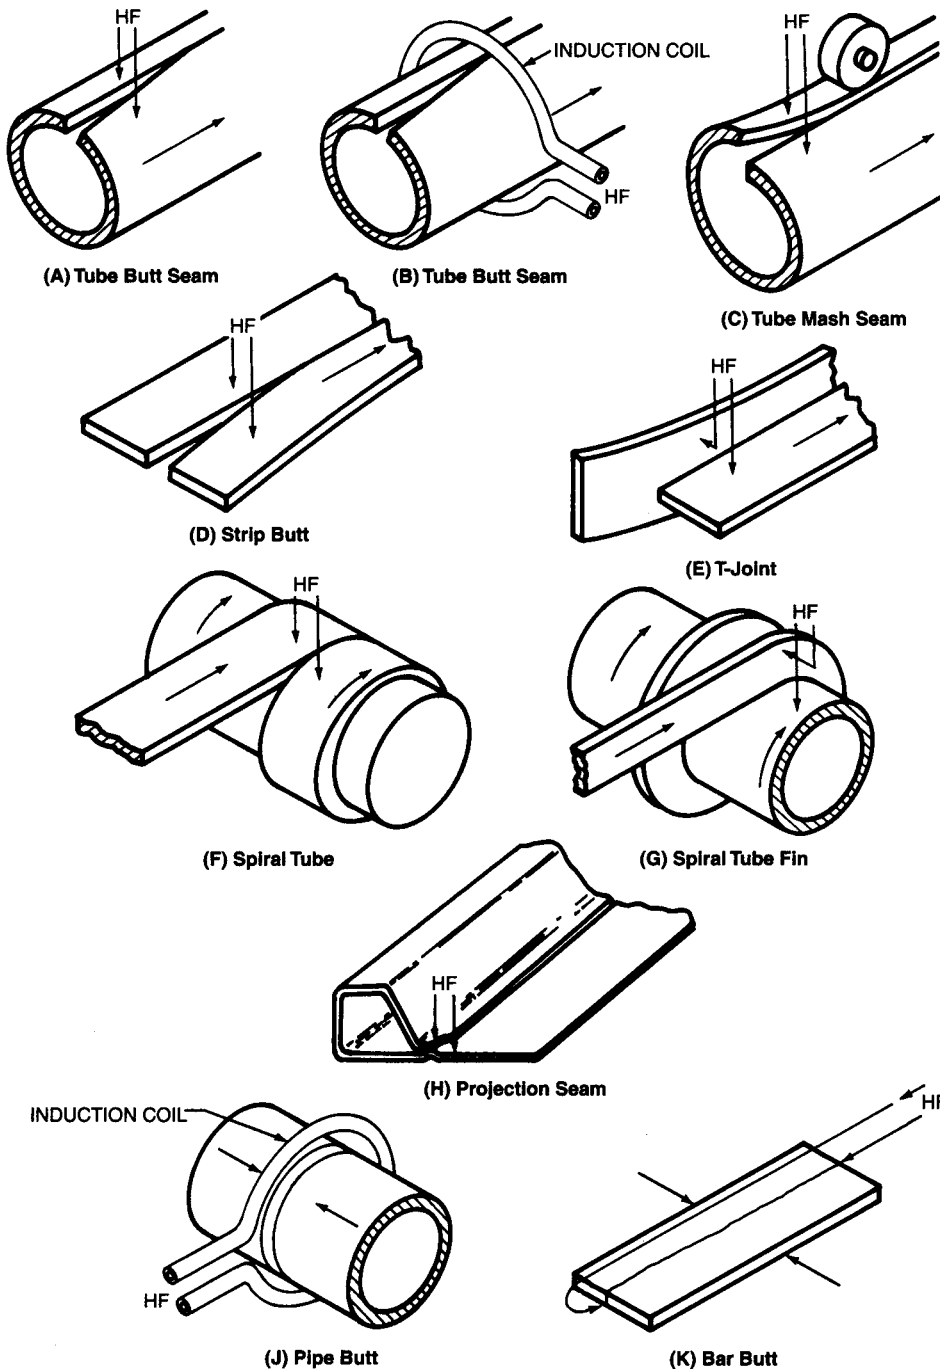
Basic joint designs for high-frequency welds in pipe, tube, sheet, and bar stock. Source: Ref 1
